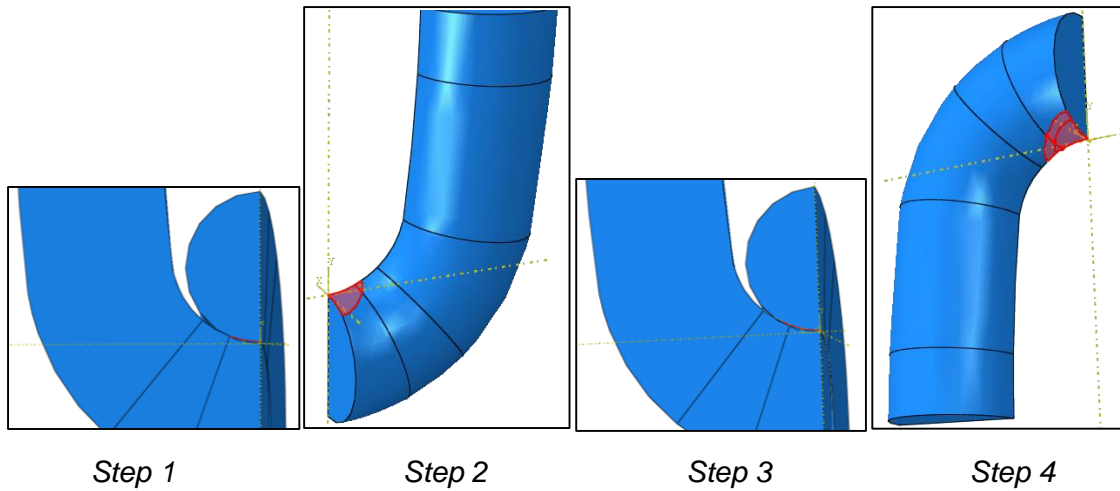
Procedure when creating a wear surface. Step 1 and 3 show overlapping parts while step 2 and 4 show cut parts and wear surfaces
